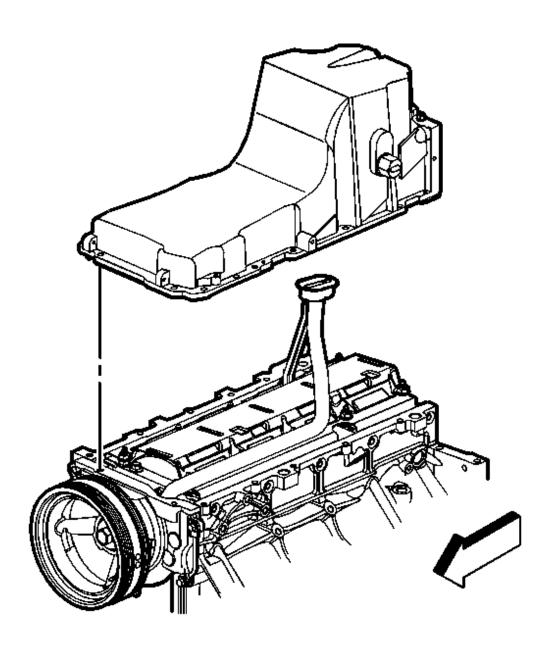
View Of Oil Pan Courtesy of GENERAL MOTORS CORP.
